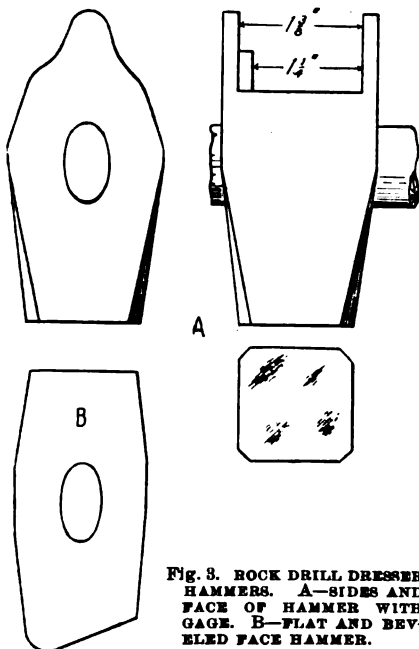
ROCK DRILL DRESSER HAMMERS. A—SIDES AND FACE OF HAMMER WITH GAGE. B—FLAT AND BEVELED FACE HAMMER.
